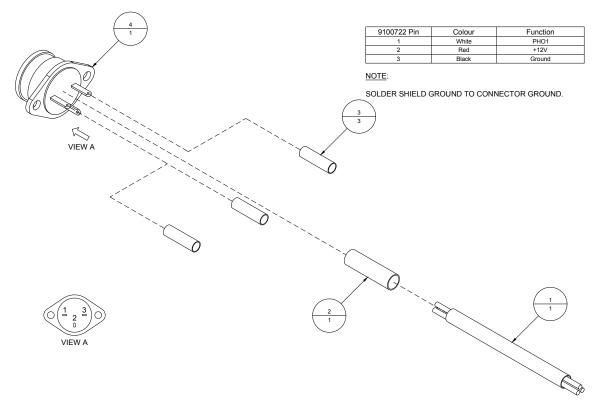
Plate, Rear Connector Assembly, BK6OB (9102430A)
